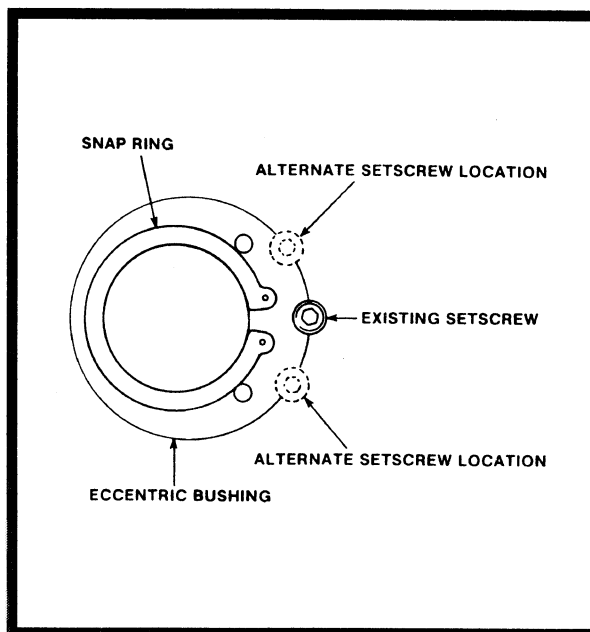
Telescope Cylinder Eccentric Bushing.
